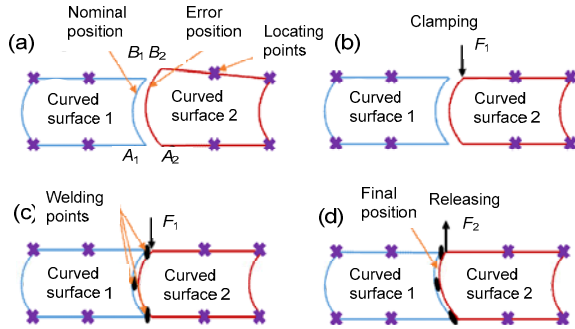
Four steps of a compliant assembly process: (a) locating process; (b) clamping process; (c) welding process; (d) releasing process
